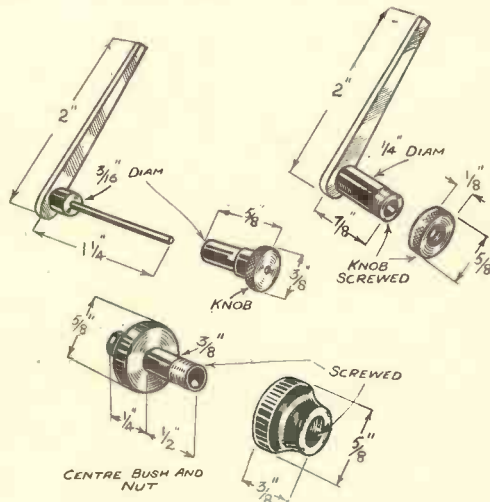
THE CONTACT FINGER AND BUSHES.
